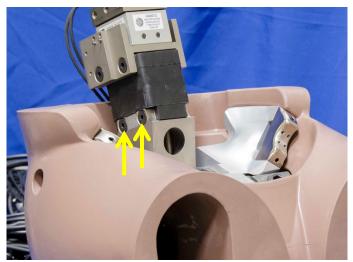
Install lumbar flex joint assembly to pelvis mounting block
